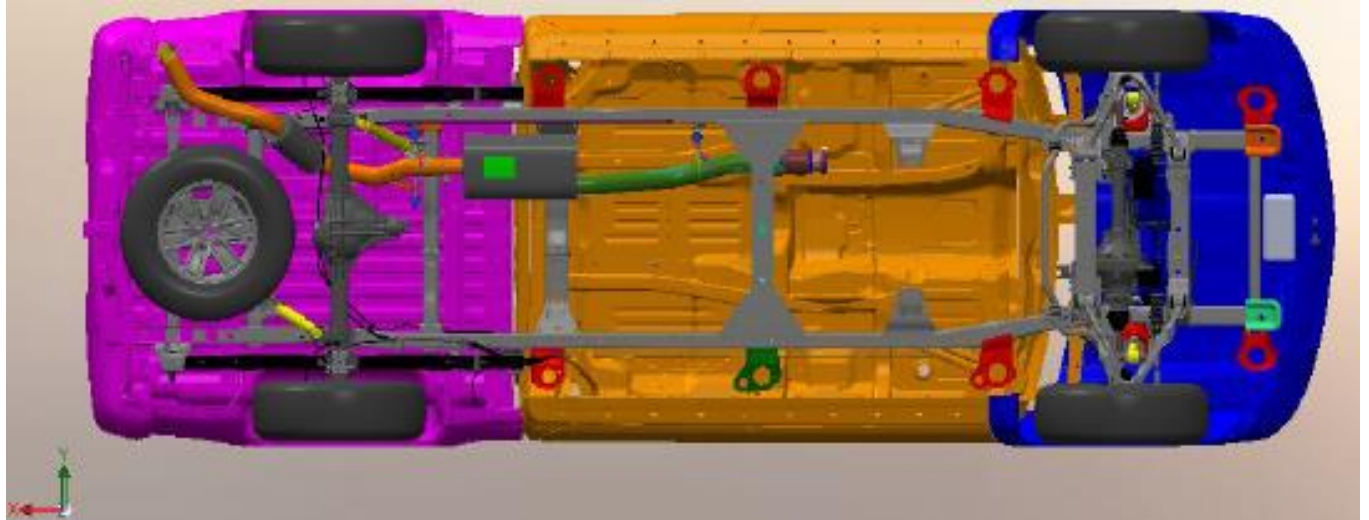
Bottom view of 2015 Chevrolet Silverado [4]
